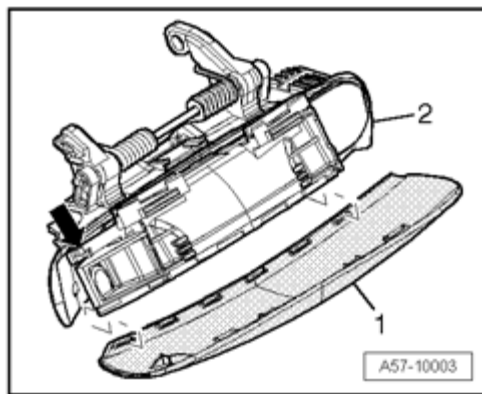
Identifying Door Handle, Locking Mechanism, And Trim
